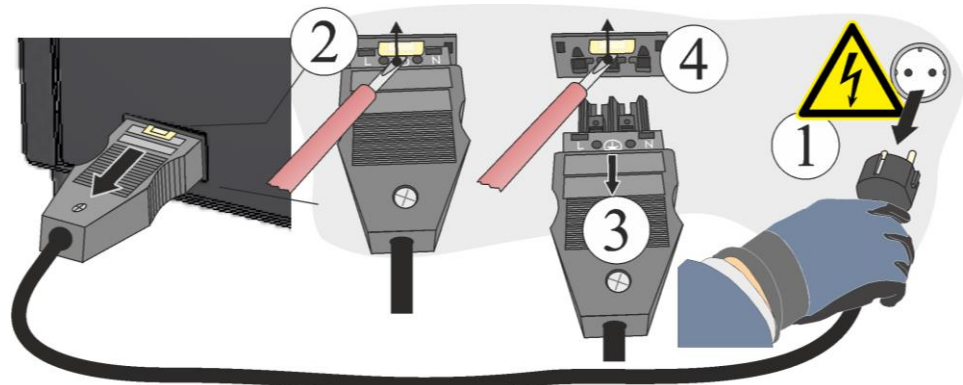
Separate the snap-in coupling (plug) from the furnace housing (similar to picture)
